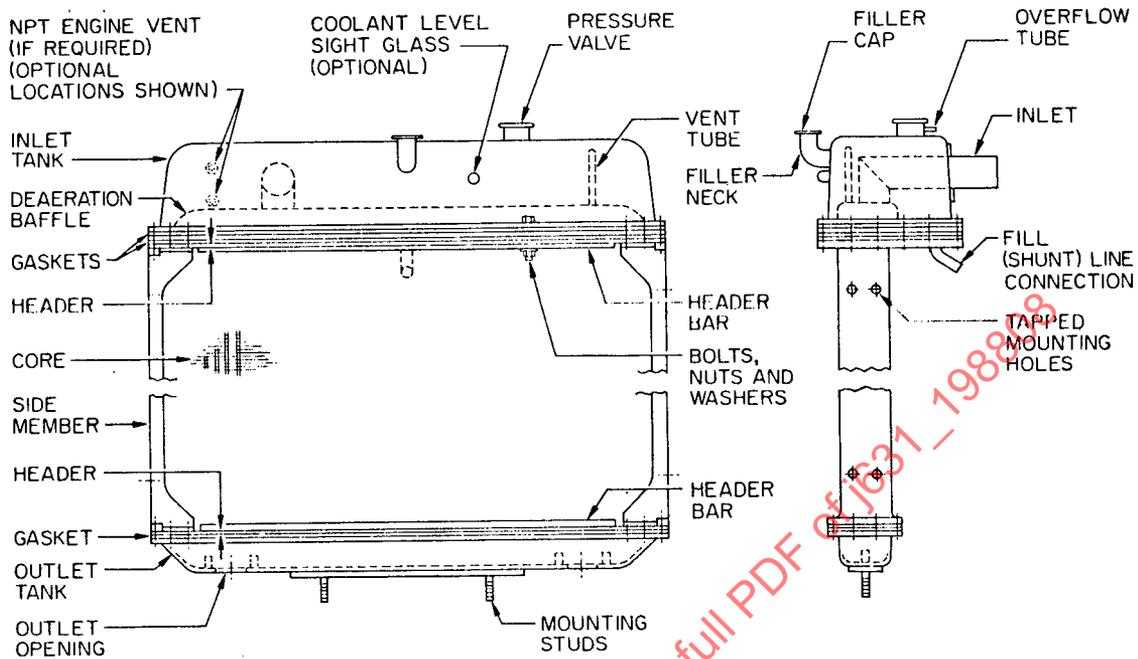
Bolted Type Radiator, Drawn Tanks (Typical Deaeration System Shown)
